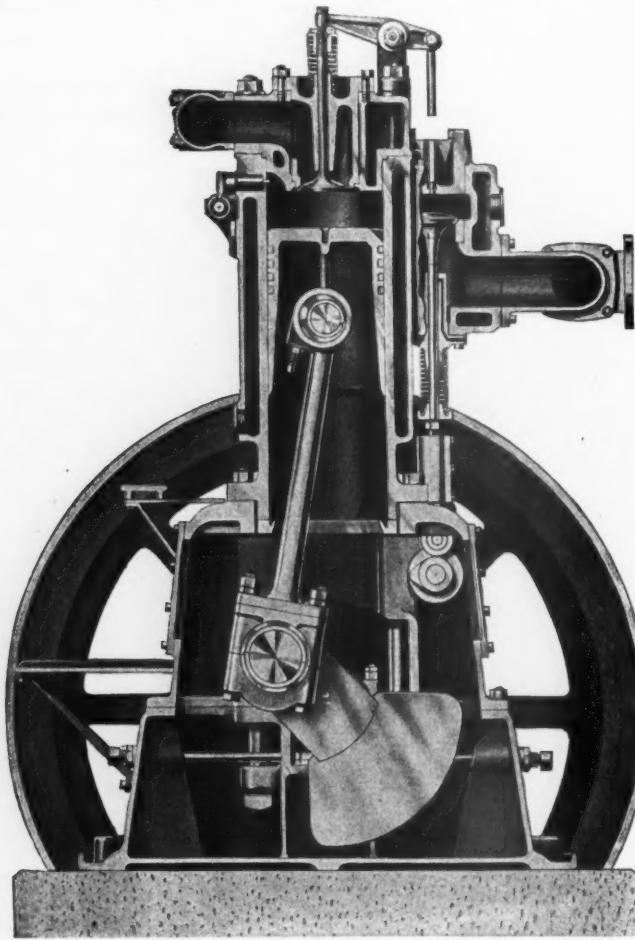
SECTIONAL VIEW OF FAIRBANKS-MORSE GAS ENGINE.
